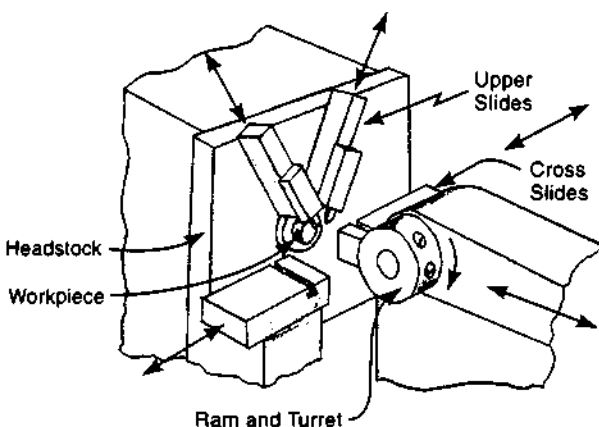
A2c1 A turret-type (Brown and Sharpe type) single spindle screw machine. The two upper slides, the two cross slides and the turret all can hold cutting tools.
